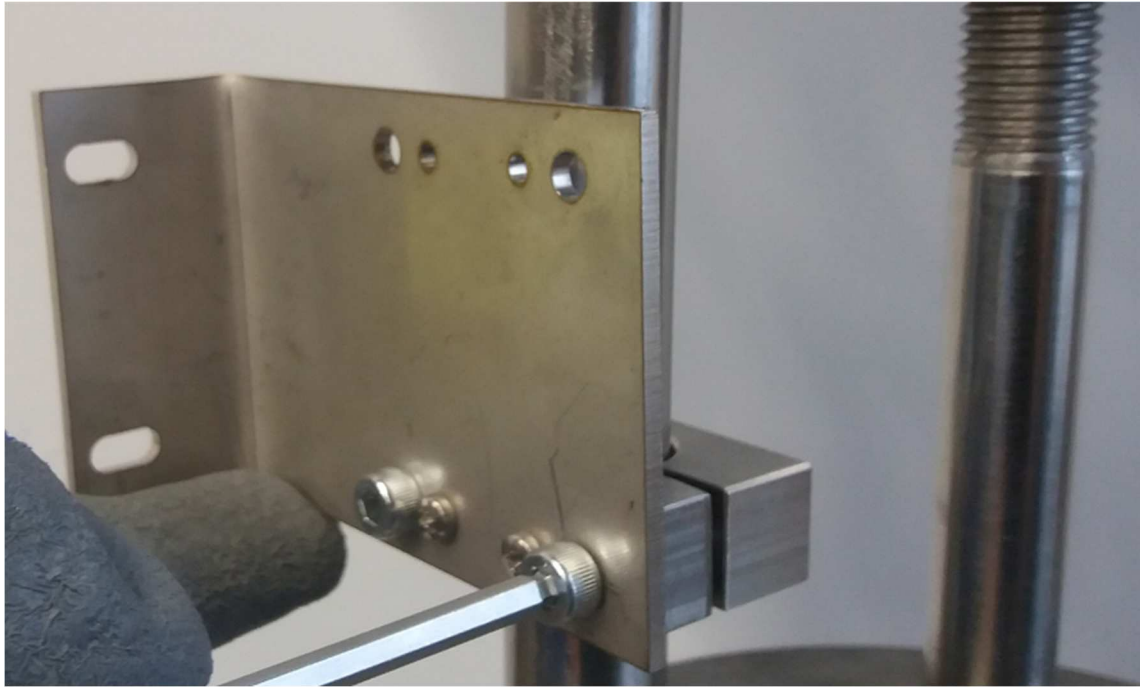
Mounting valve clamp on the valve columns (elements are not tightened).
